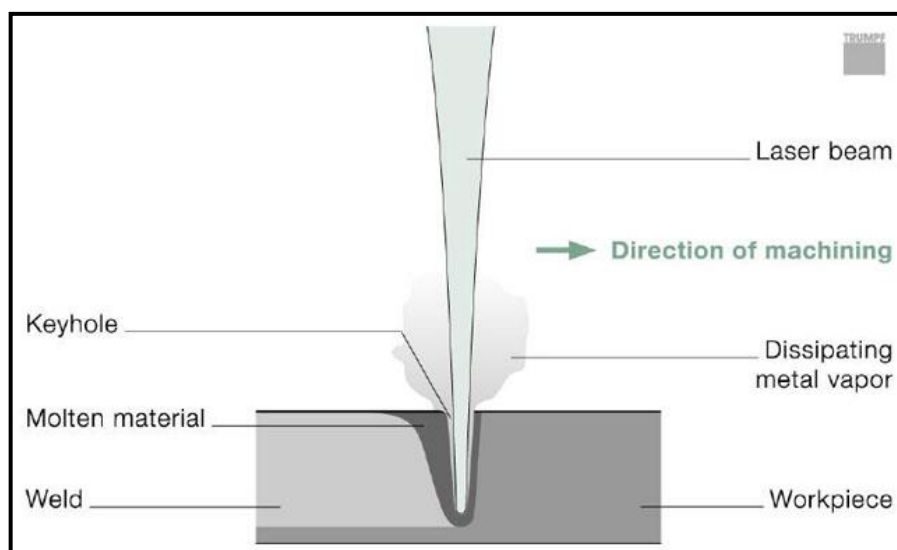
Deep penetration welding and keyhole.
